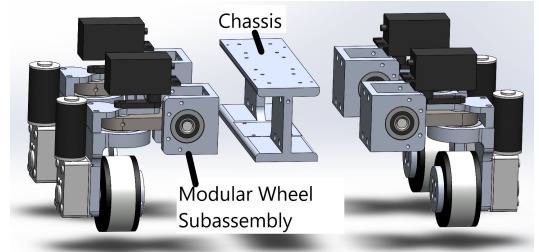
Exploded CAD Model showing distinction between Modular Wheel Subassemblies and the Chassis.
